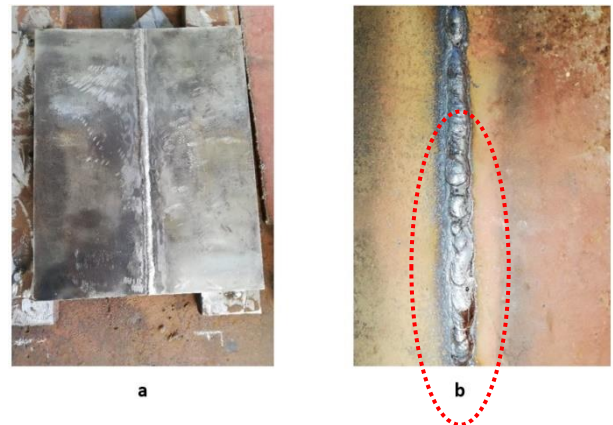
Fourth welding joints: a) Face pass. b) Root pass
